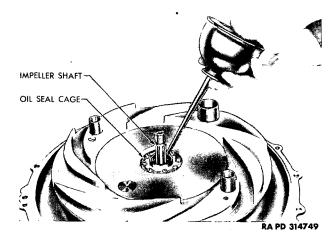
Oiling Between Impeller Drive Shaft and Oil Seal Cage
